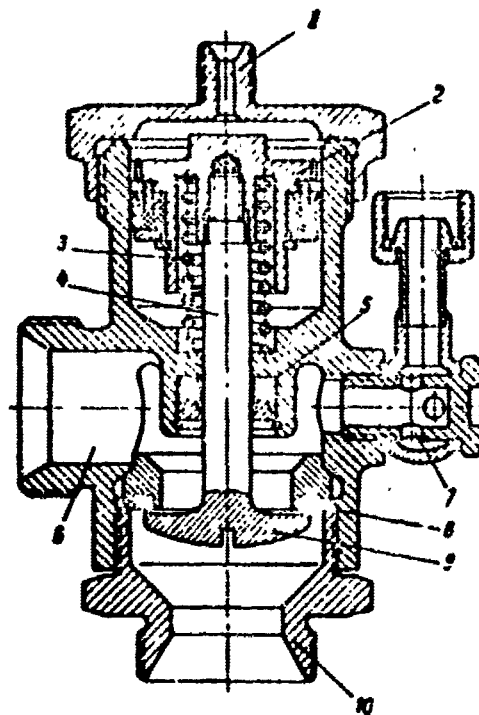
Auxiliary valve with pneumatic servo-piston. 1) control valve; 2) servo-piston; 3) valve; 4) valve; 5) valve; 6) valve; 7) valve; 8) valve; 9) valve; 10) valve seat.
